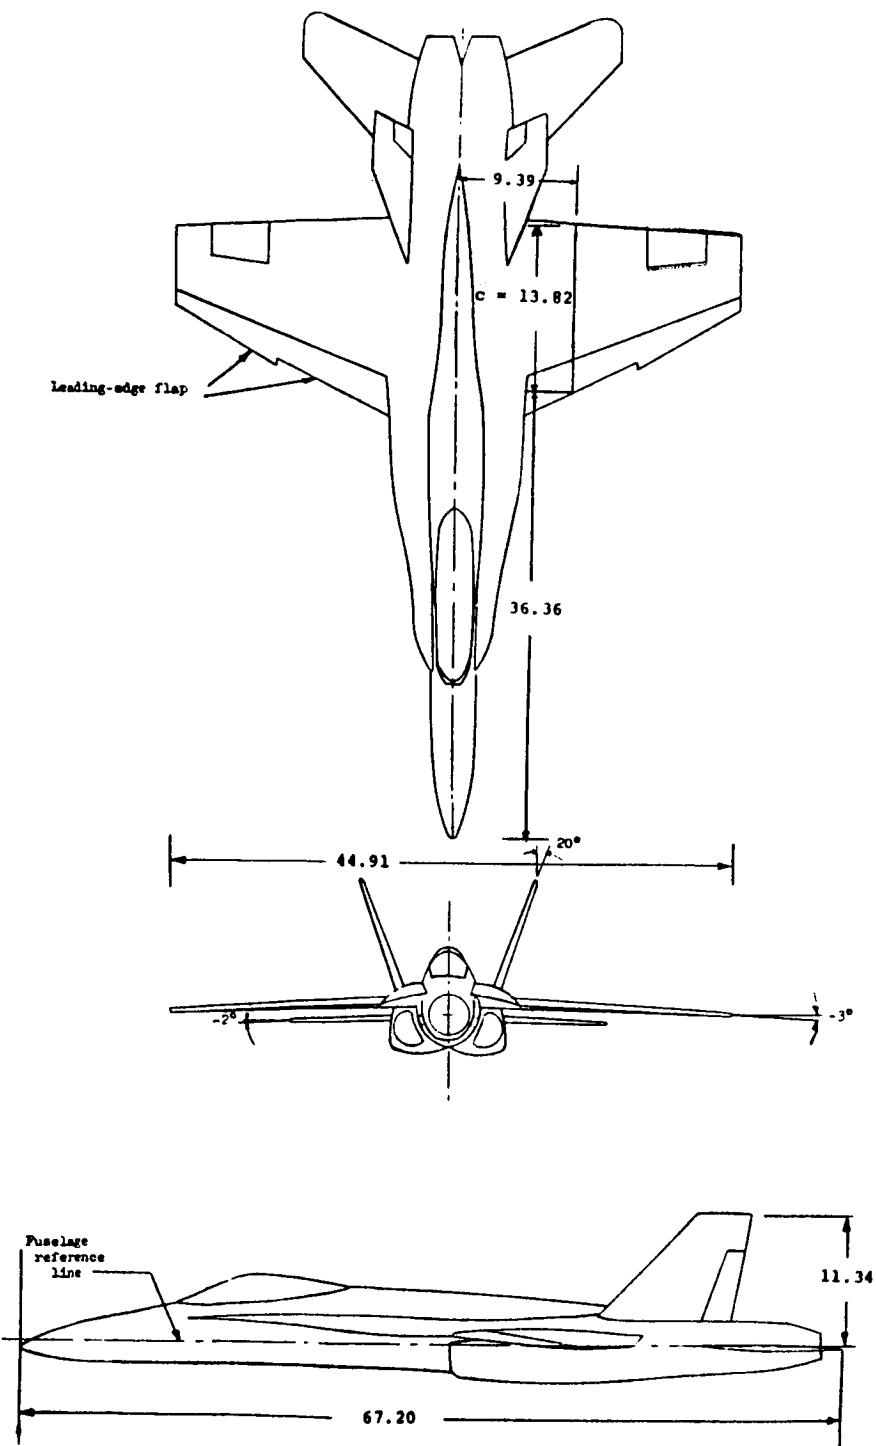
Three-view drawing of 1/10-model of McDonnell Douglas F-18 airplane
